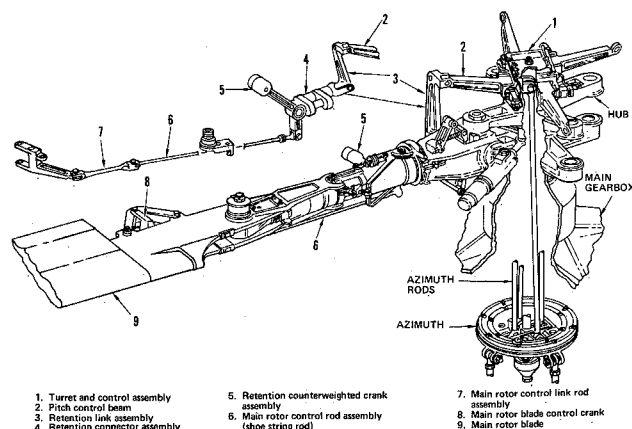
SH-2F main rotor control rod assembly and retention assembly control linkage.
